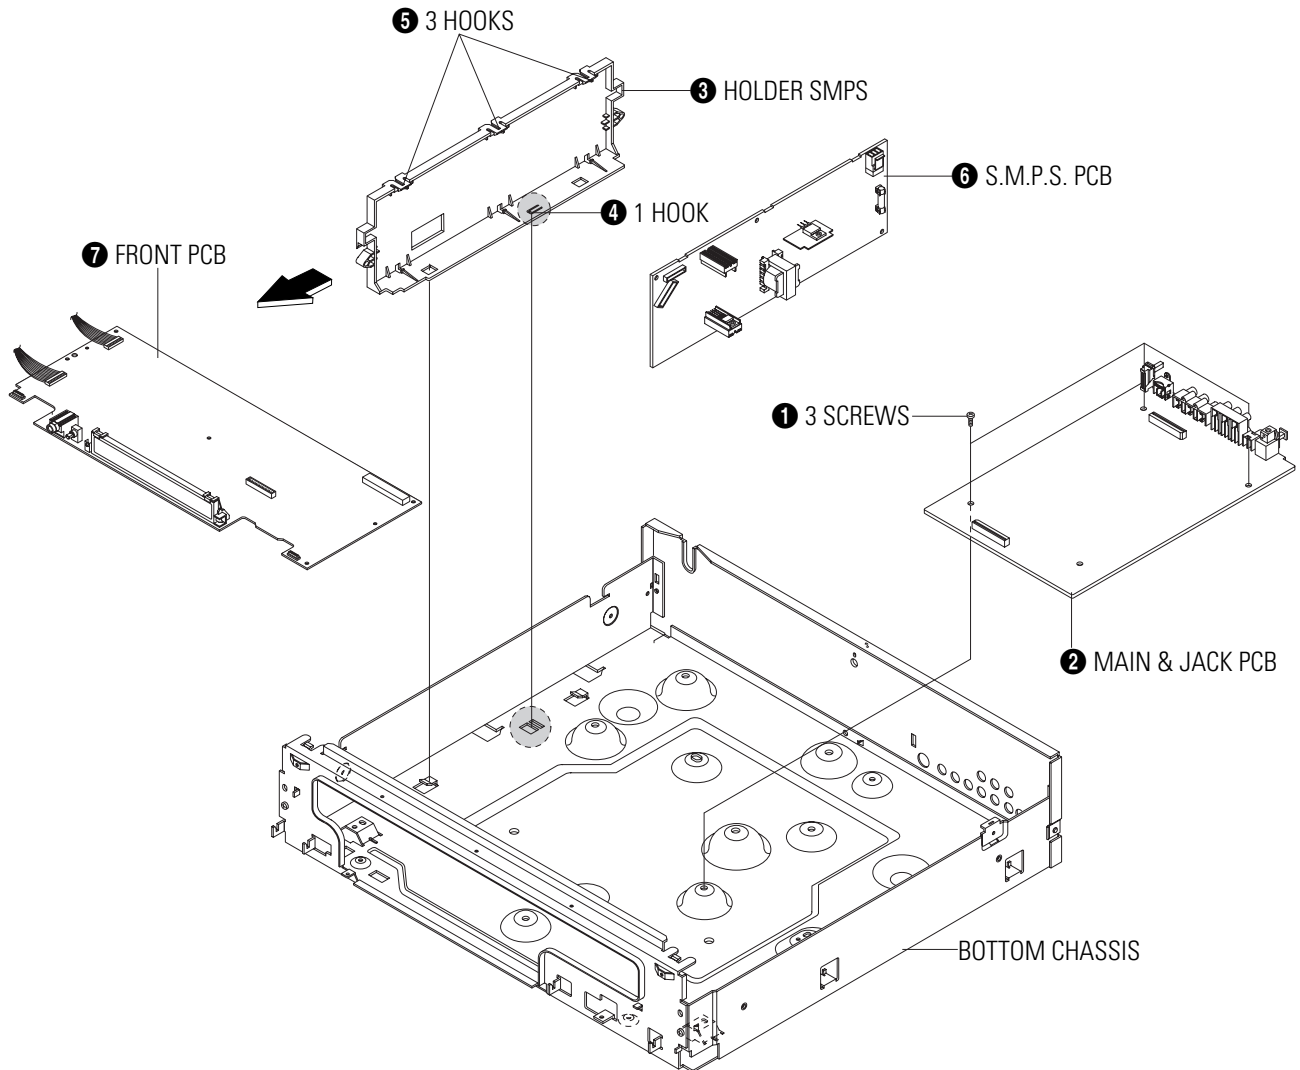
Main & Jack PCB, S.M.P.S. PCB, Front PCB Removal
